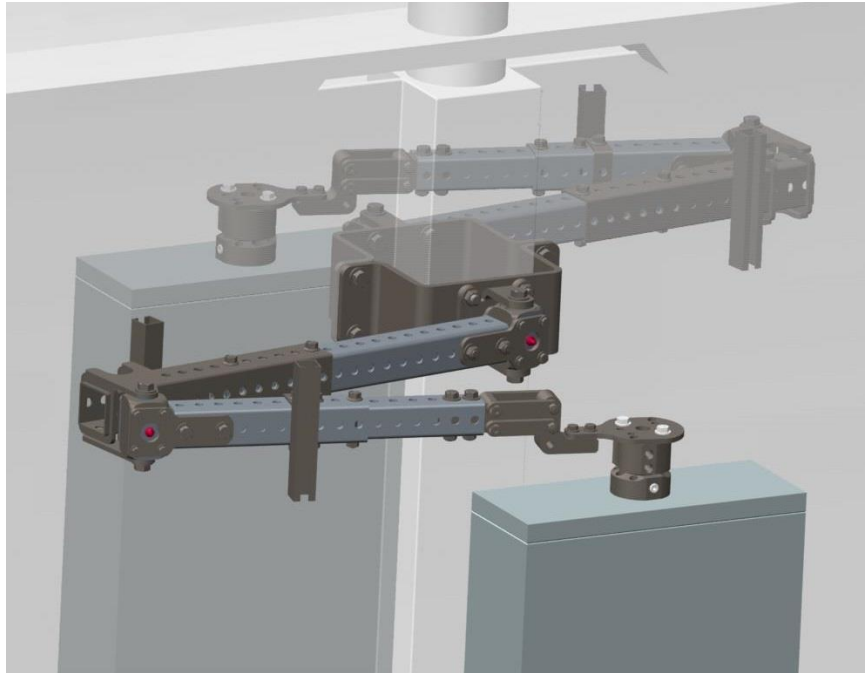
Two arms mounted back-to-back in a Horizontal Machining Center
